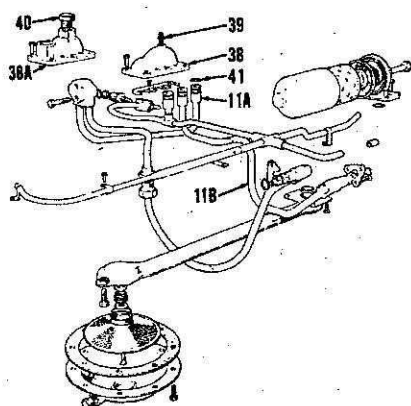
View showing hydraulic lines and filters for early models 880 and 990. On model 4600 and late models 880 and 990, a full flow filter element (see Fig. 212) is used instead of the by-pass type filter assembly.
